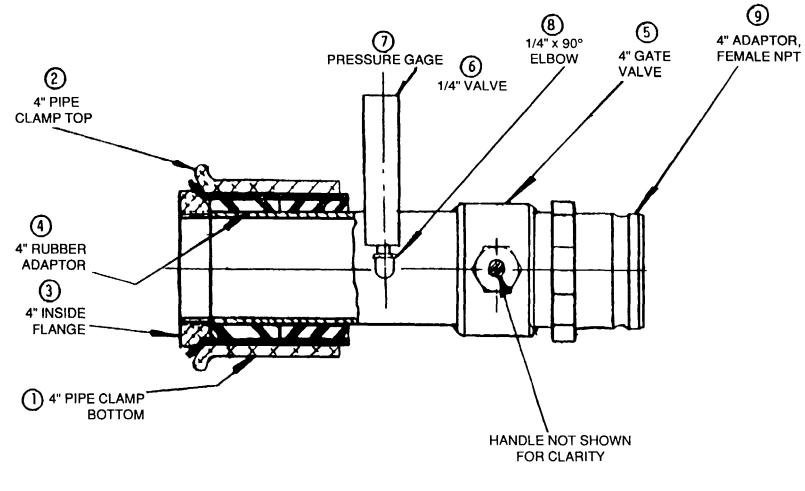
FILLER/DISCHARGE ASSEMBLY (MODEL 5,000 gallon)
